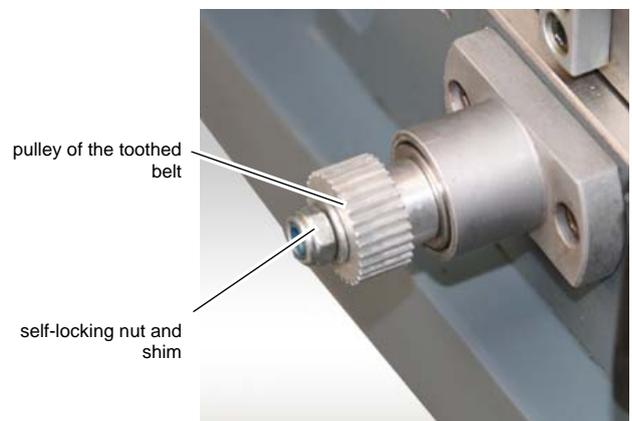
Assembly of the pulley of the toothed belt Y axis
